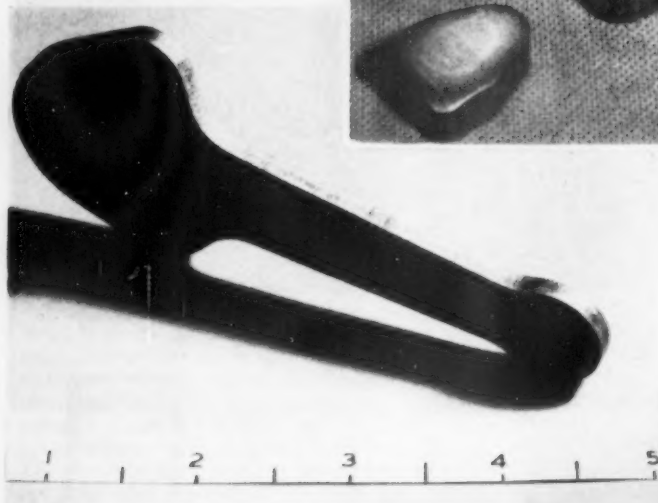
(c) (below).—Material $\frac{1}{8}$ -in. thick low-carbon steel; die radius 0.030 in.; clearance 0.0005 in. per side
